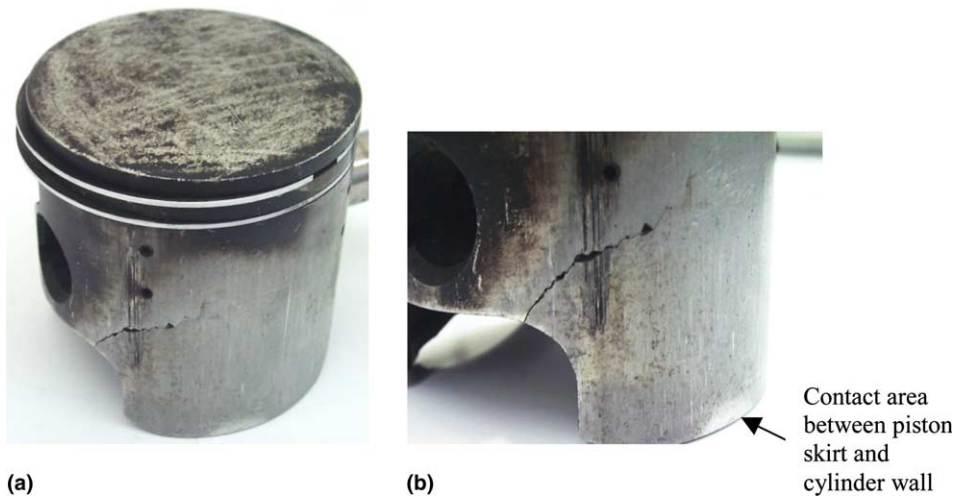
Engine piston with damaged skirt: (a) piston; (b) detail of damaged skirt.
